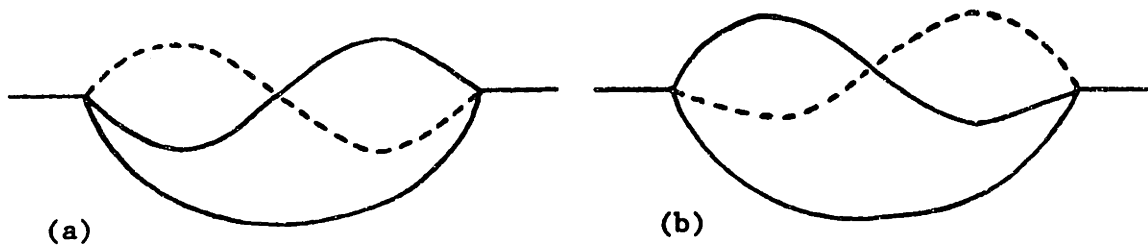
Weld pool surface oscillatory modal shapes for sloshing mode in moving welds: a) GTA, b) GMA.
